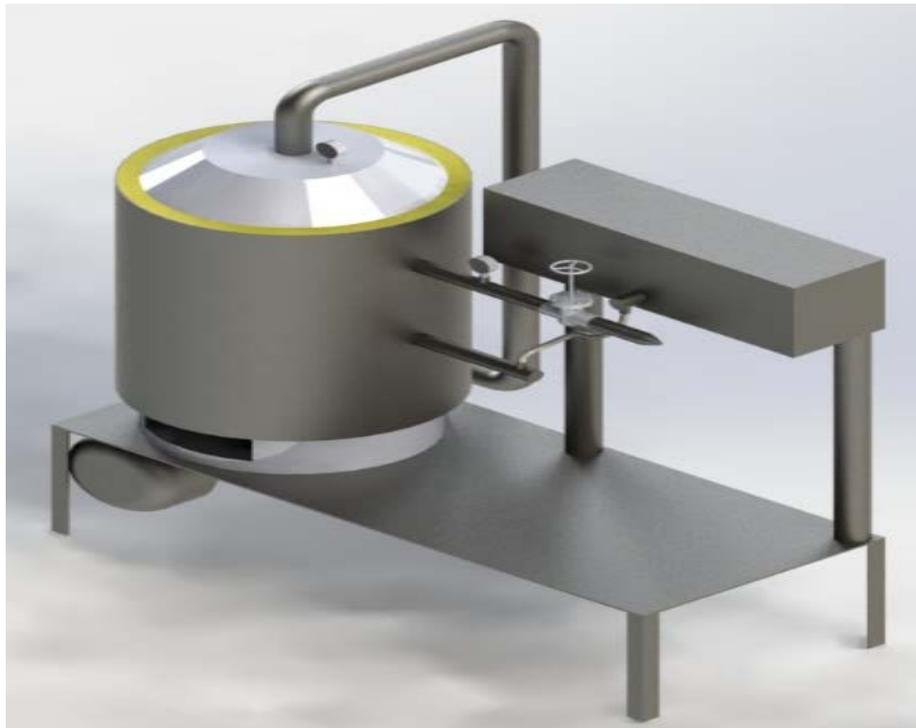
is the two-dimensional view of a boiler in an AutoCAD environment. Figure 5 and 6 show the exploded and assembly view, respectively, of the designed boiler.
